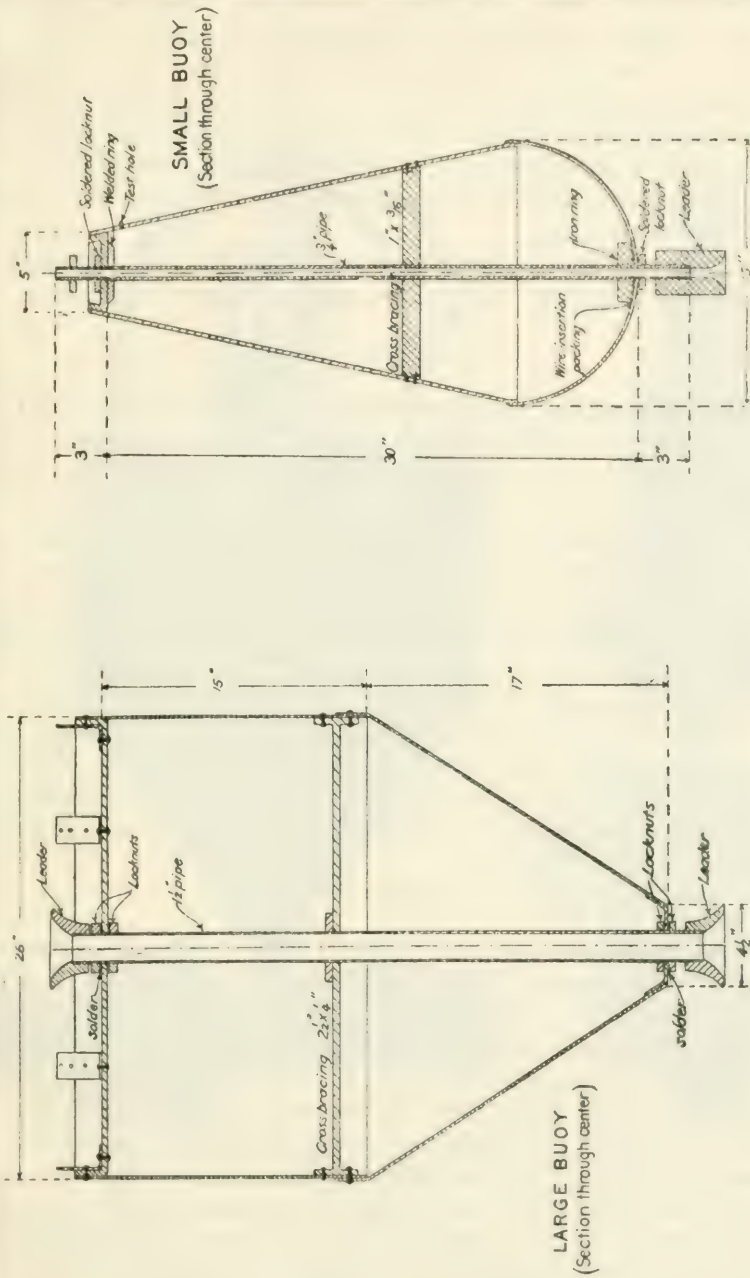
DESIGN FOR LARGE AND SMALL BUOYS.
